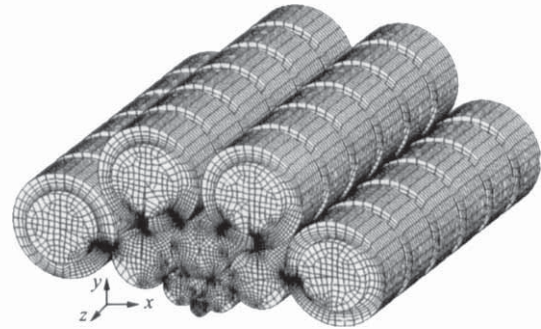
Geometry and meshing of roll system in Sendzimir mill
